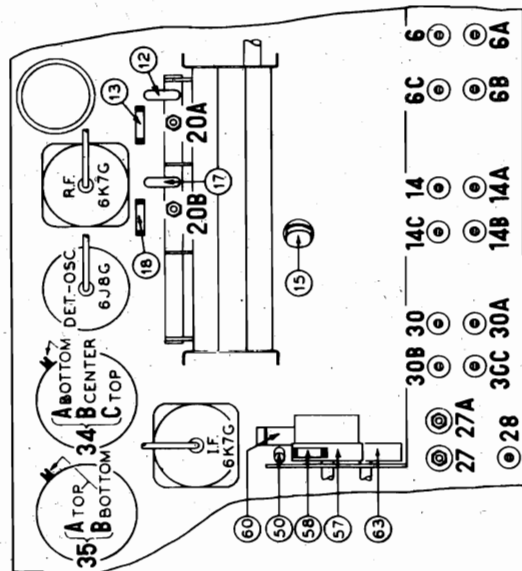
Compensator Locations: Top, Front View of Chassis.
